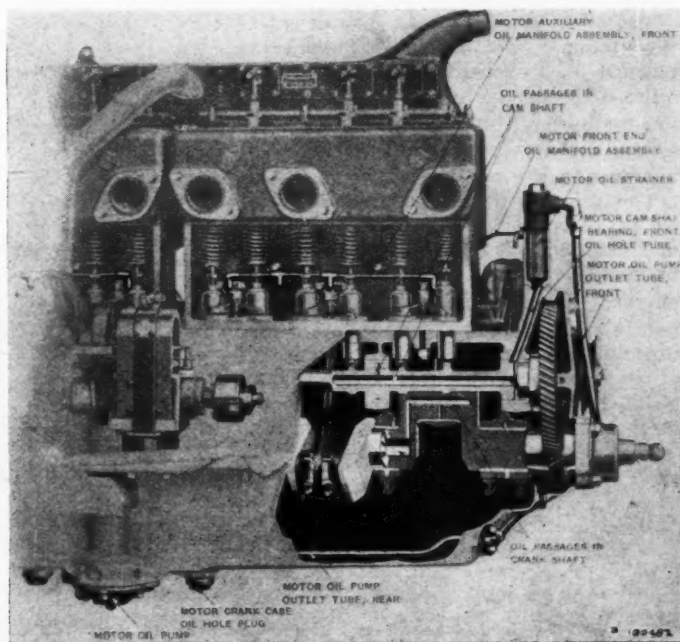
Partial cutaway of Packard 3-48 engine to show oil passages in drilled crankshaft
